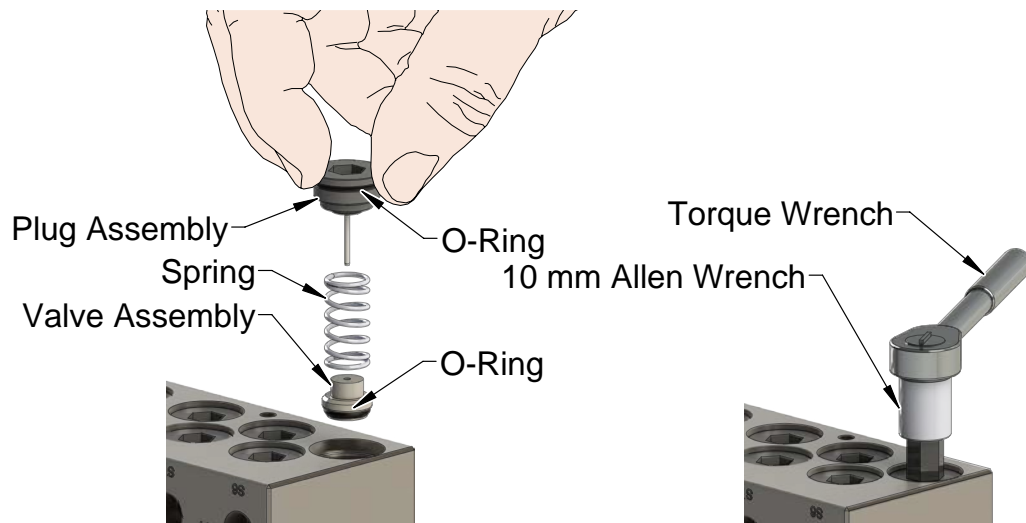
Tool Self-Sealing Valve (Disassembly)
